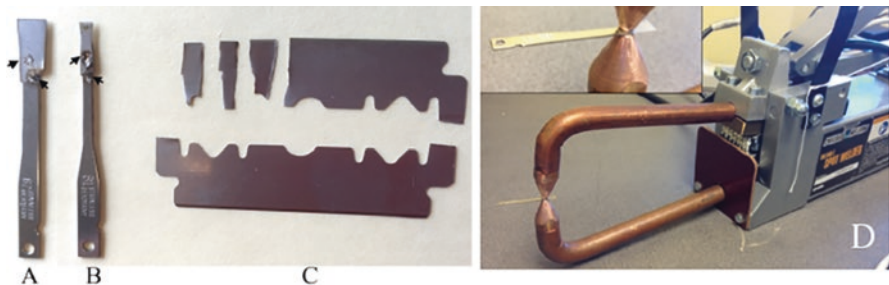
The blade consists of a metal shaft and cutting tip that are welded together (arrowheads). (a) Wide shaft for wide tip and (b) narrow shaft for narrow one. (c) Illustration of the rough blade pieces from a breakable razor. (d) A portable 120-volt spot welder attaches a piece of razor blade with a metal shaft. The razor blade tip is trimmed to the required shape and size by a mini grinder
